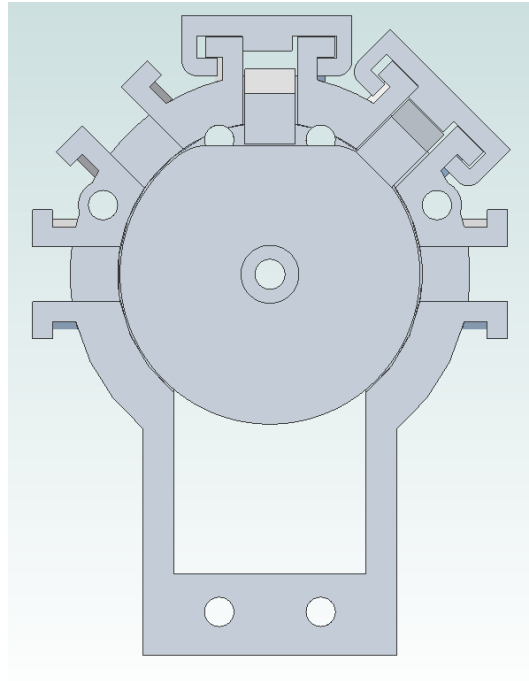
Drawing of 3D printed pinch valve assembly with face removed. The pinchers and center cam are laser cut from Delrin while all other parts are 3D printed. The left slot is normally left unused to provide a position where all valves are closed. Shown in the assembly are two assembled pinchers. The top pincher is in the open position while the upper right pincher is in the closed position. Tubes are fed through on the axis normal to the page.
